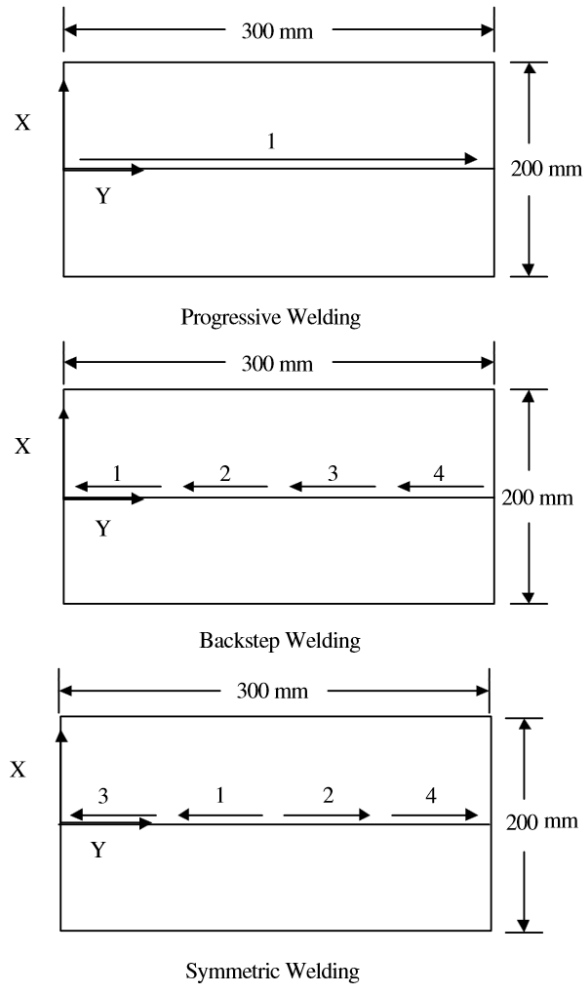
Different welding sequences applied for thin wall butt welds [32]
